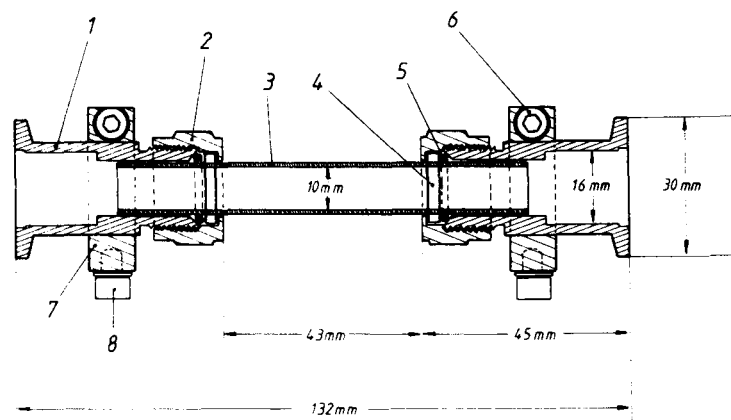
Construction of the hollow cathode. 1 vacuum connecting flanges; 2 glass tube connecting rings; 3 glass tube; 4 synthetic ring; 5 O-ring; 6 clamping bolt; 7 terminal block; 8 electrode connecting bolt. Adapted from [Deet-86].
